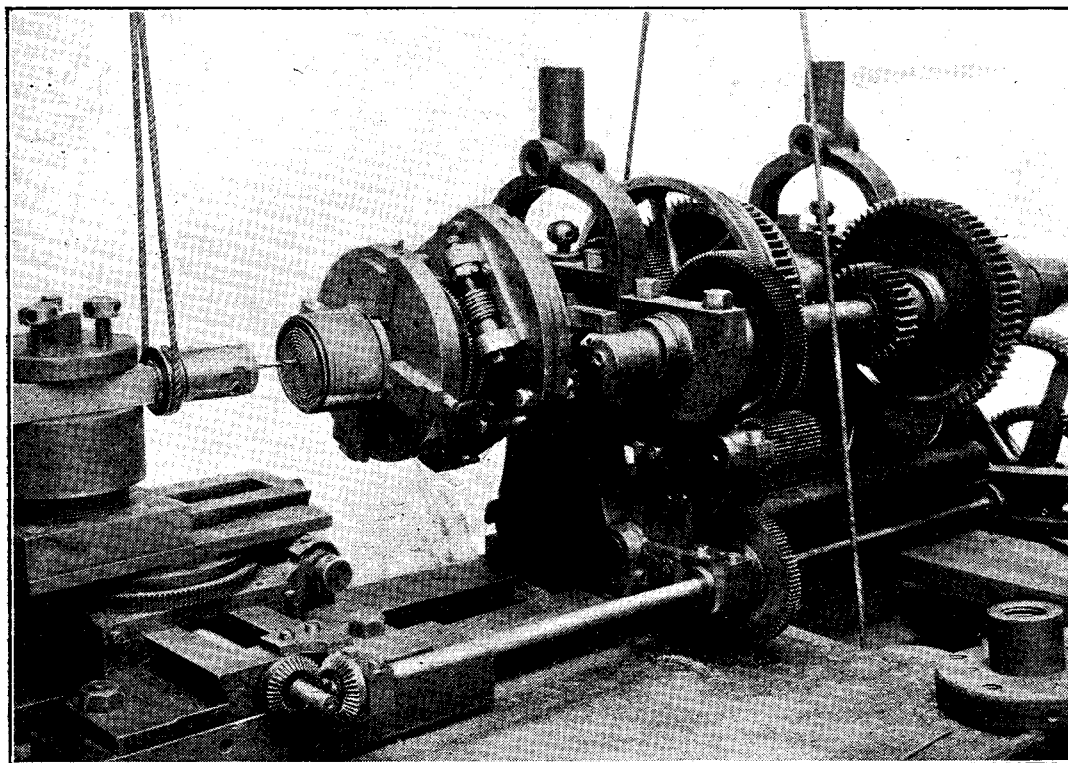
Back of Lathe showing Oval Scroll, and Surfacing Gear for Slide-Rest
